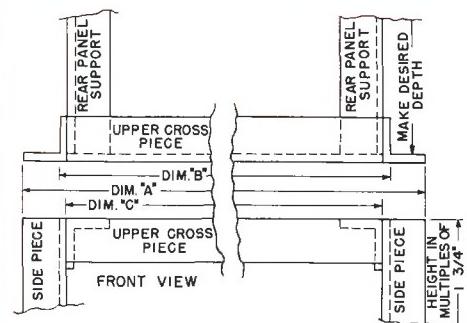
SKETCH showing assembly of angles for sides, top and bottom, and rear panel supports. Table below gives dimensions.
